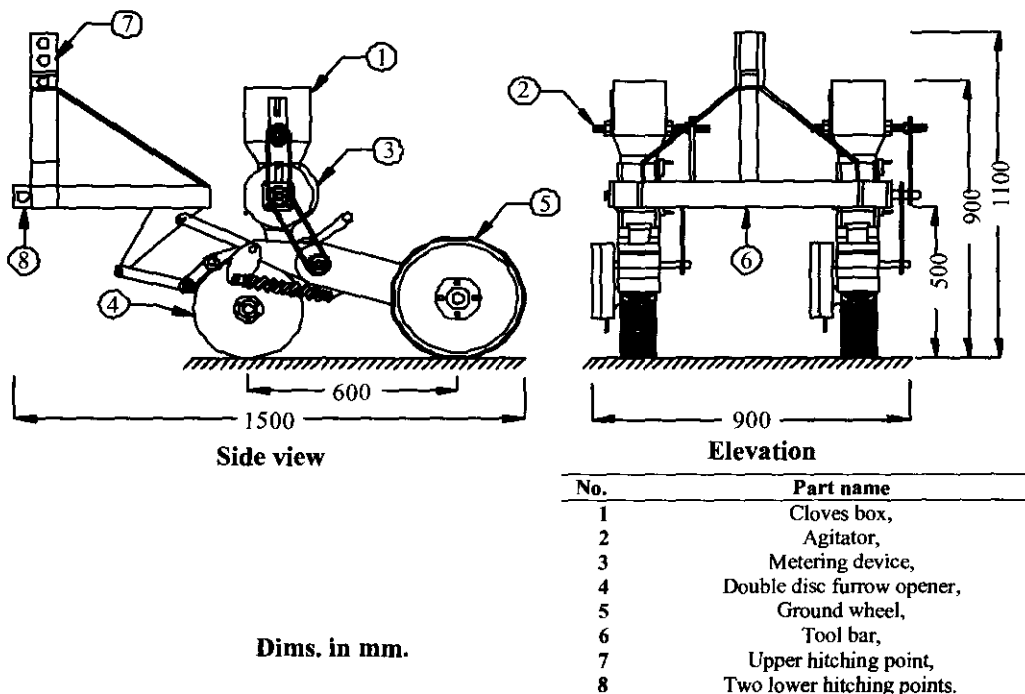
Elevation and side views of the developed garlic-cloves planter
